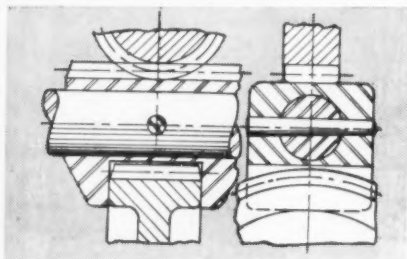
This sketch shows a type of shifting shoe which is approximately square in design.
